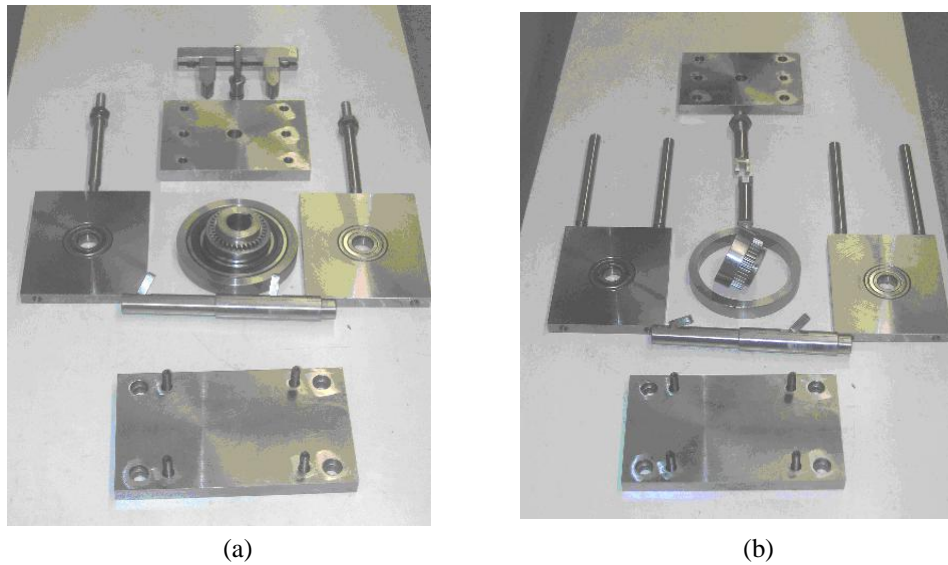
Components of the System pre-cracking due to fatigue (a) Bend-flexion Mechanism (b) (C(T)) Tension Mechanism
